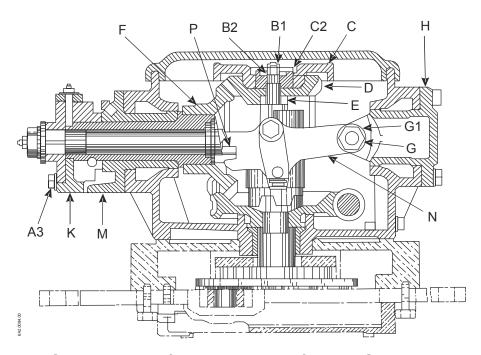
Sectional View from Motor End of M-23A Gear Box (Right-Hand Installation)
